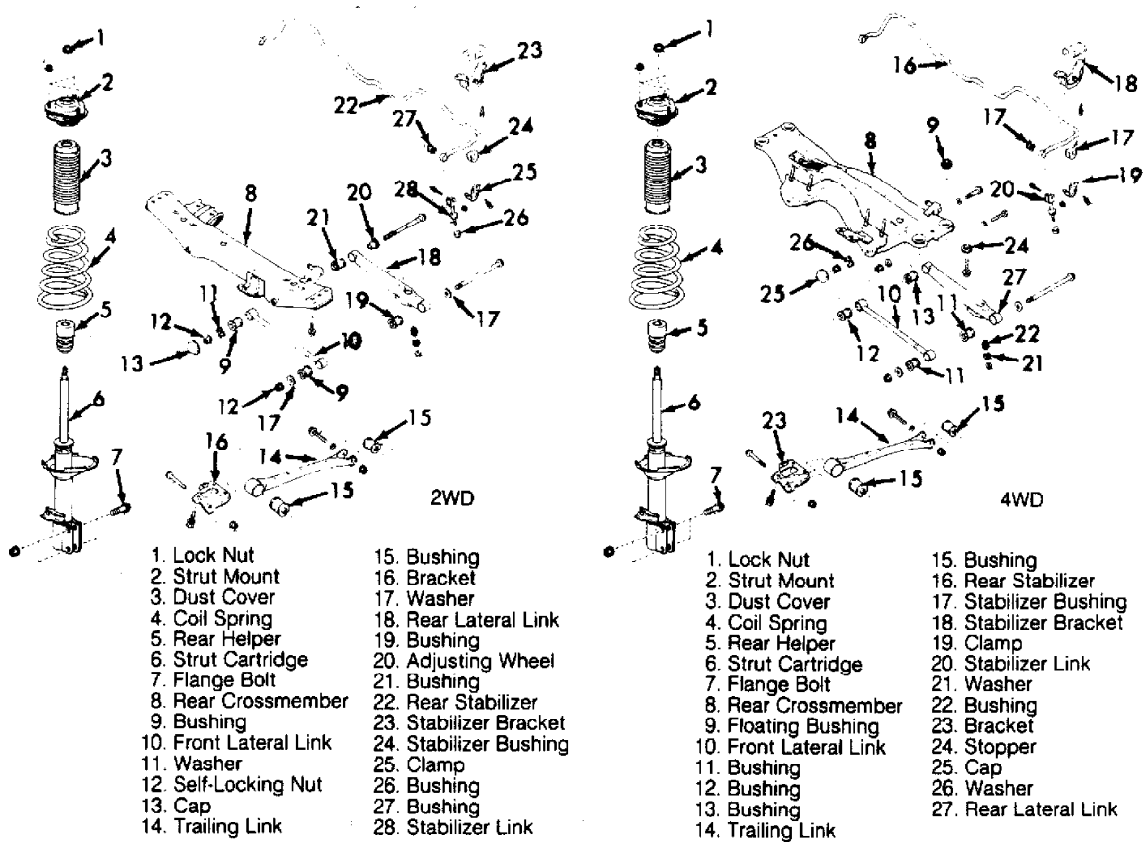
Rear Suspension & Strut Assembly (Legacy Shown; SVX Is Similar To Legacy 4WD)
